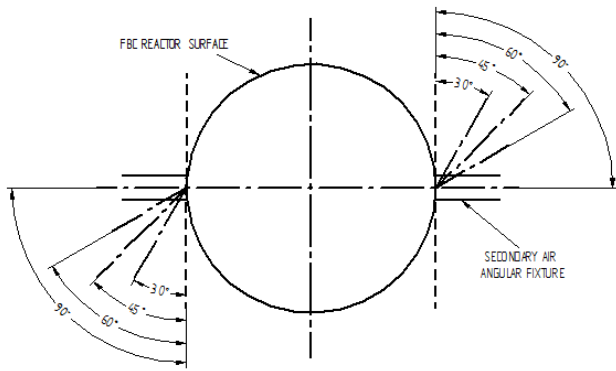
Schematic Sketch of sectional view A-A for air injection fixtures
